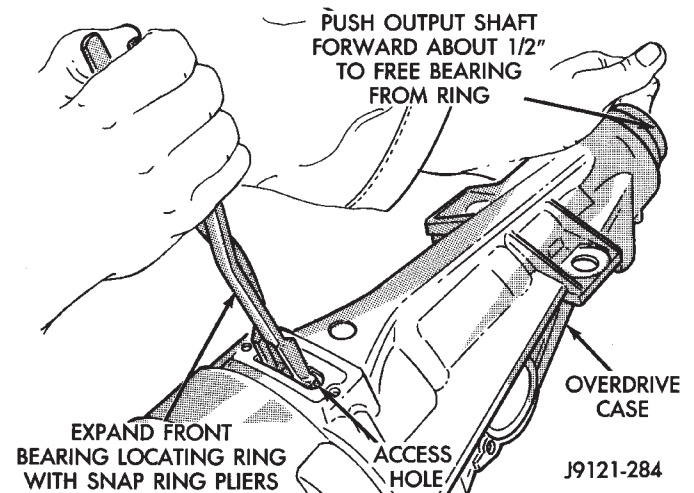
Releasing Shaft Front Bearing From Locating Ring
